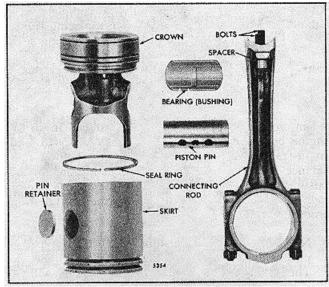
Cross-Head Piston and Connecting Rod Components
